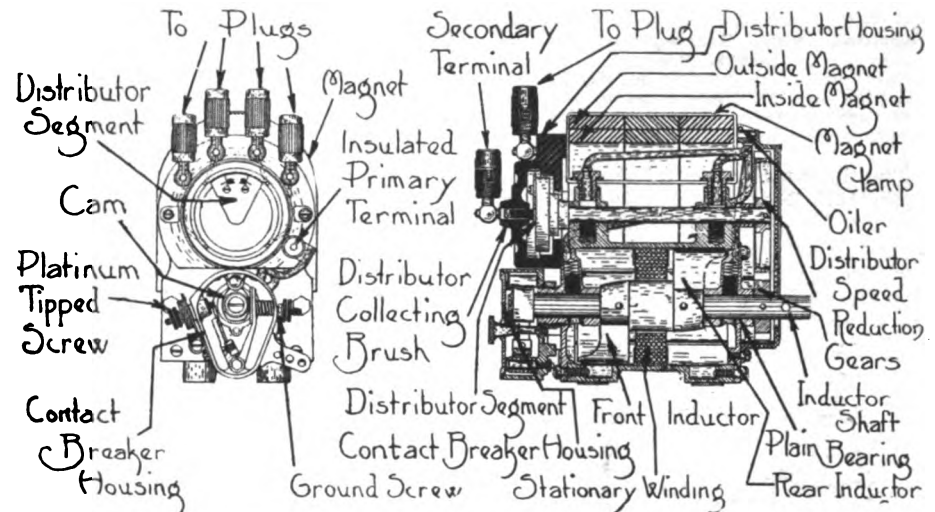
Showing Circuit Breaker and Distributor and View of the Working Mechanism of a Magneto Designed for a Four-Cylinder Motor.
